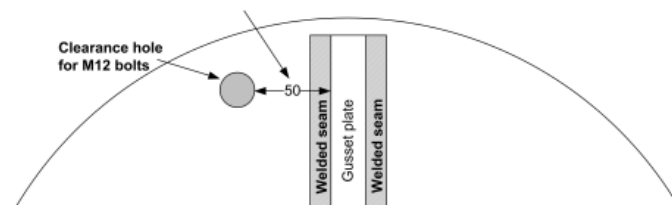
ADU mast flange, distance to the welded seam
